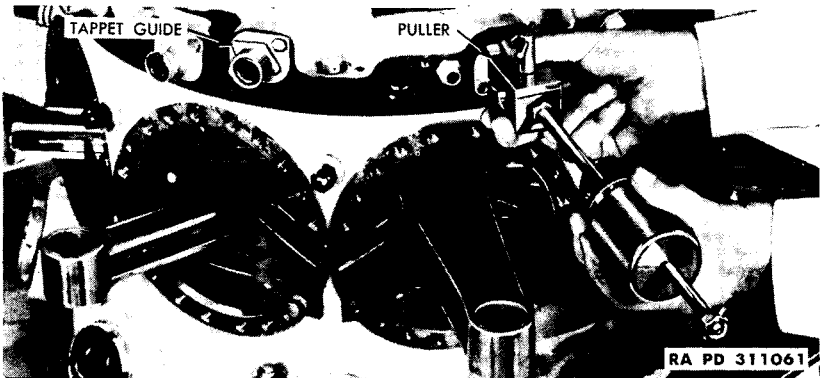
Removing Valve Tappet Guide, Using Puller 5A2282
